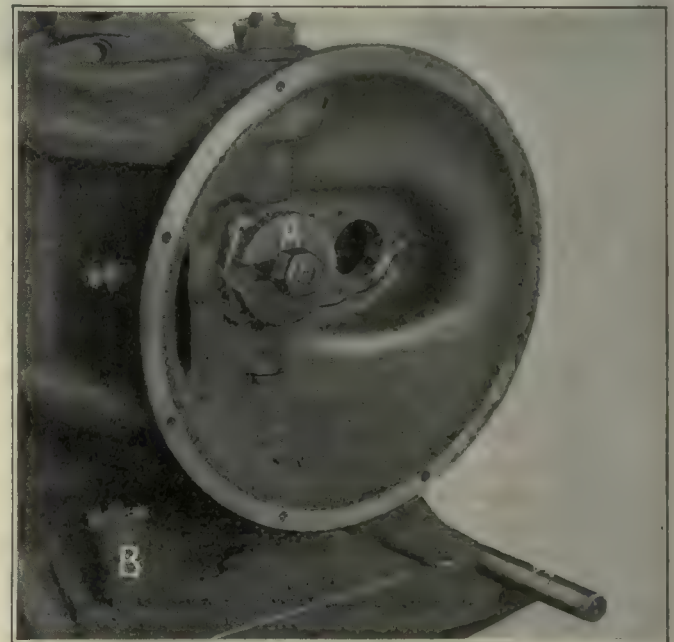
BORING HOLE FOR CONTROL SHAFT
